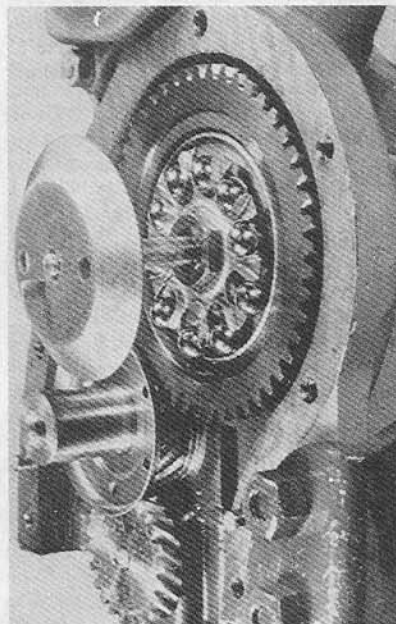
Model TO30 engine timing gears and Novl governor (ball type) assembly installation. Reinstall governor shaft and upper race assembly so that the projection on the front face of the race is at the 8 o'clock position as shown.
